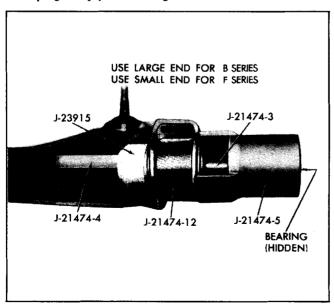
Removing Lower Control Arm Front Bushing (B & F Series)
